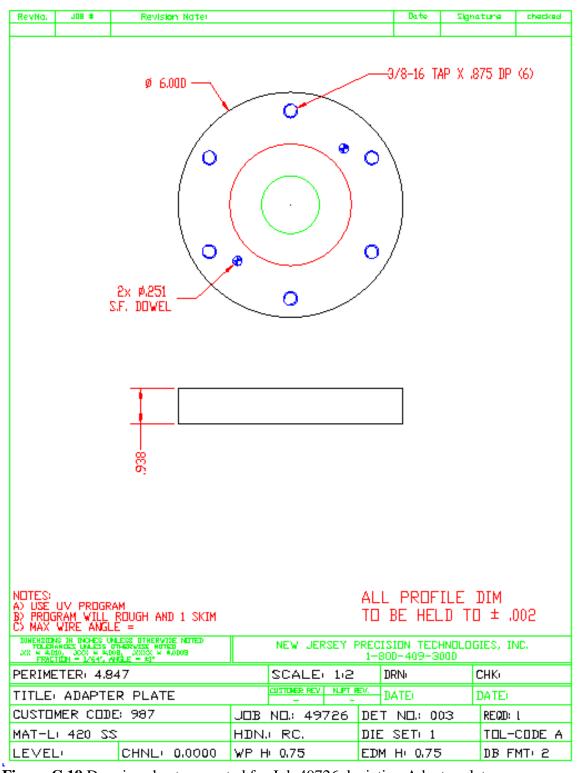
Drawing sheet generated for Job 49726 depicting Adapter plate.
